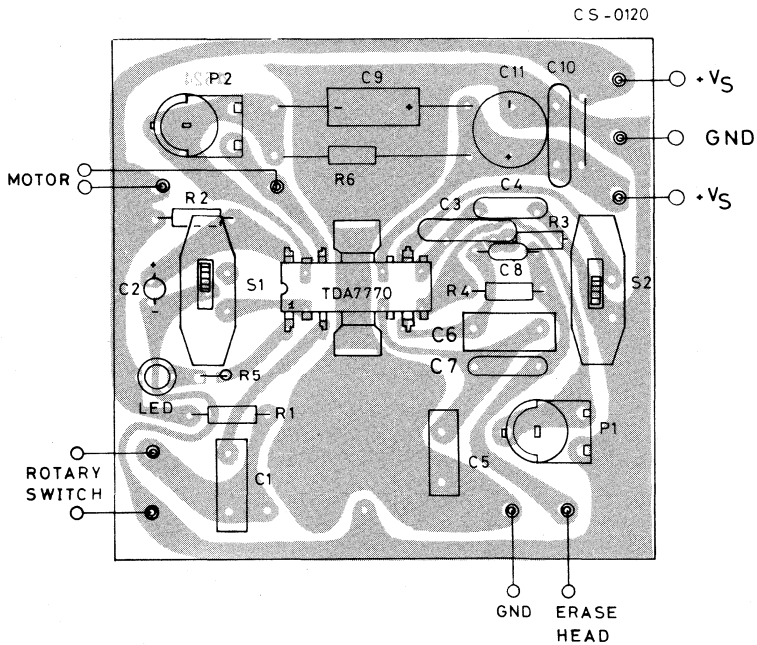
PC board and component layout of the circuit of Fig. 7
